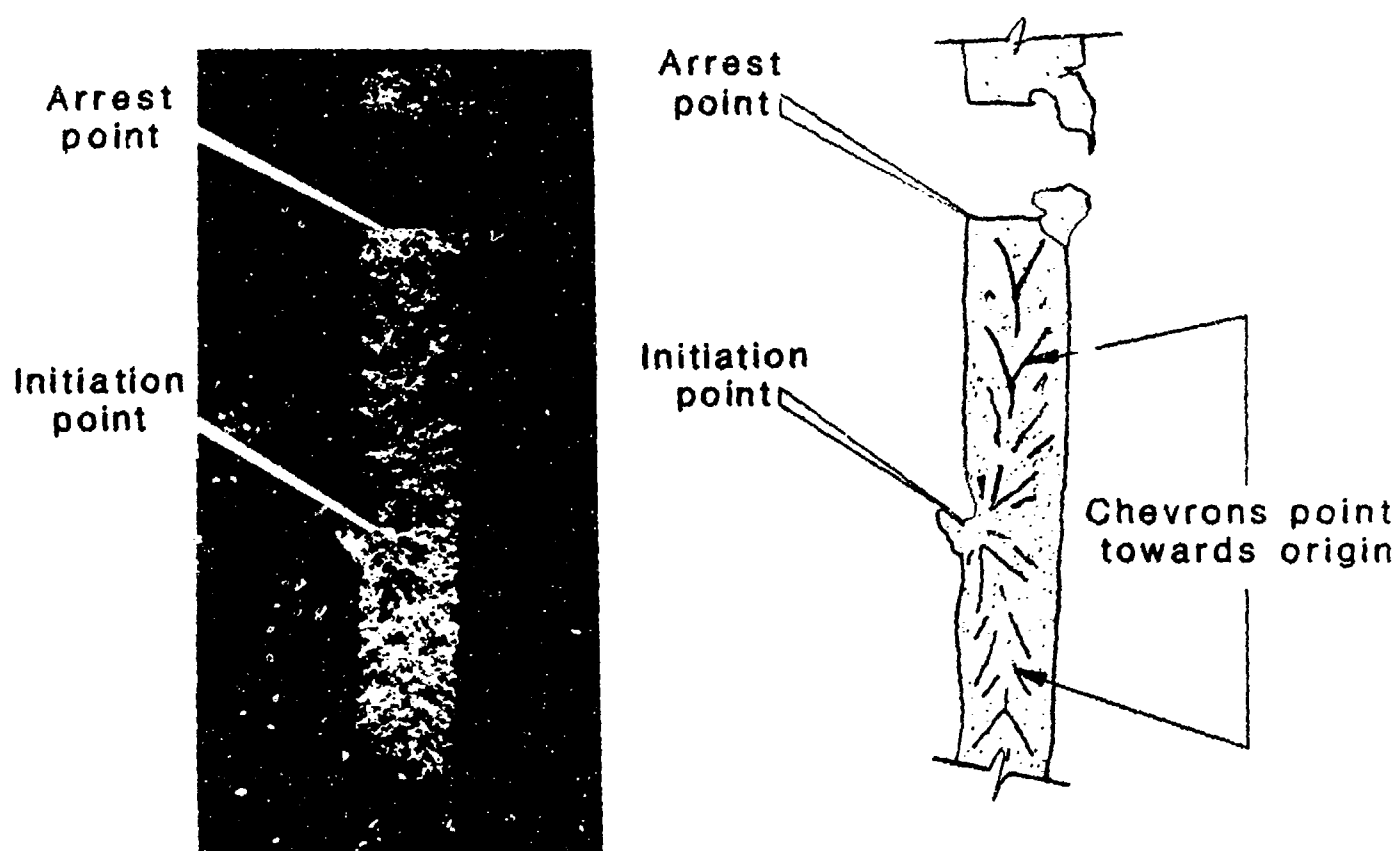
Piece No. 3 (Top of Longitudinal Bulkhead) Initiation Site Showing Crack Entering Piece No. 3 through Weld of Angle to Piece No. 3. Crack Goes to Rivet Hole on Right and Down the Bulkhead
